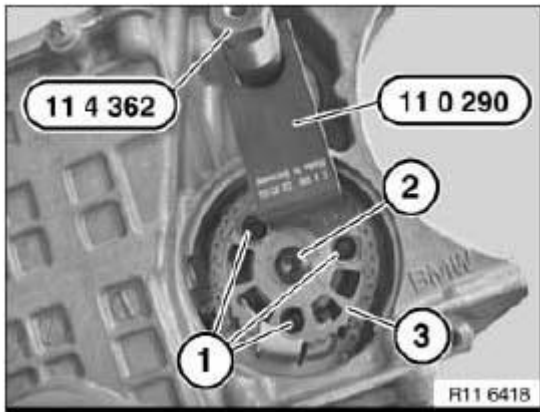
Identifying Special Tool (11 0 290), (11 4 362), Sprocket Wheel And Screws
